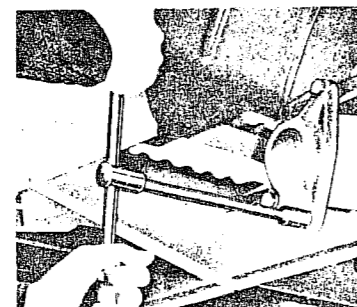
Unbolting the torsion bar cover plate - Swing axle.
